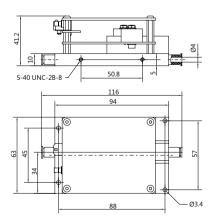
Outline drawing of DPS series driver with general purpose pad
